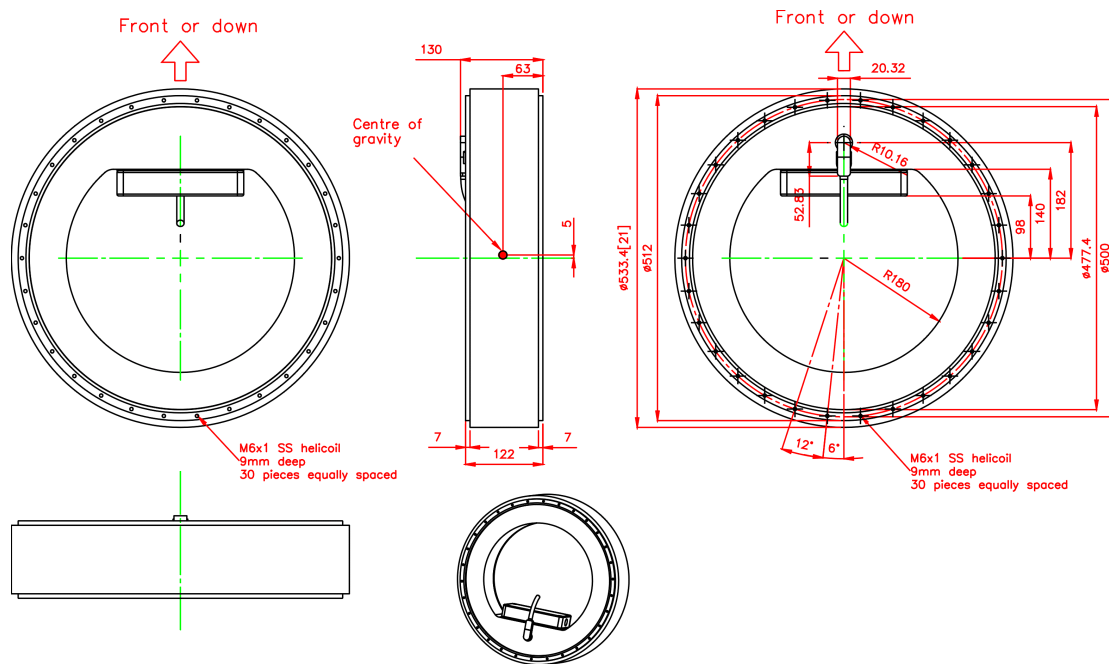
Outline Dimensions of EM 7201 Receiver Unit
